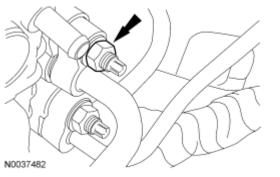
Locating A/C Tube To Condenser Nut Courtesy of FORD MOTOR CO.
